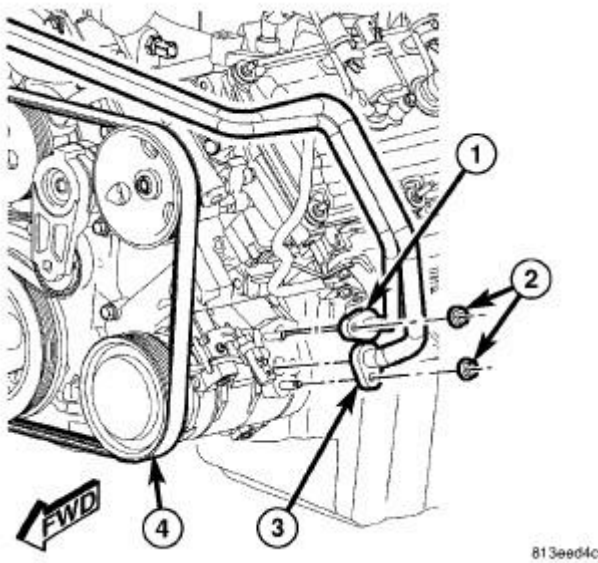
Refrigerant Lines-Compressor - Removing/Installing
